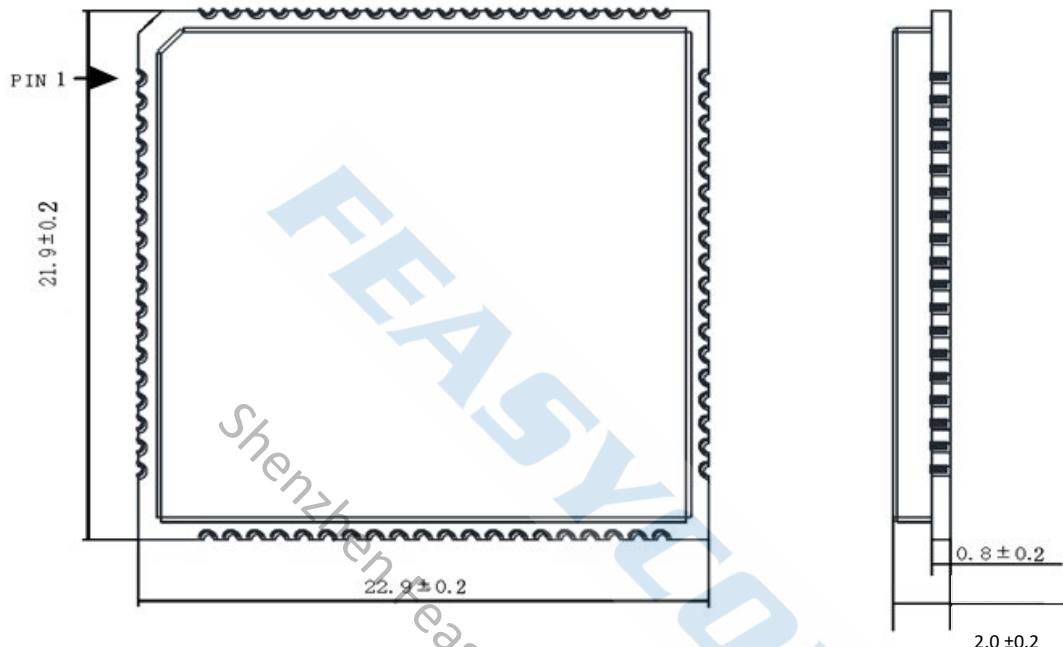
FSC-CL4040 footprint Layout Guide (Top View)
